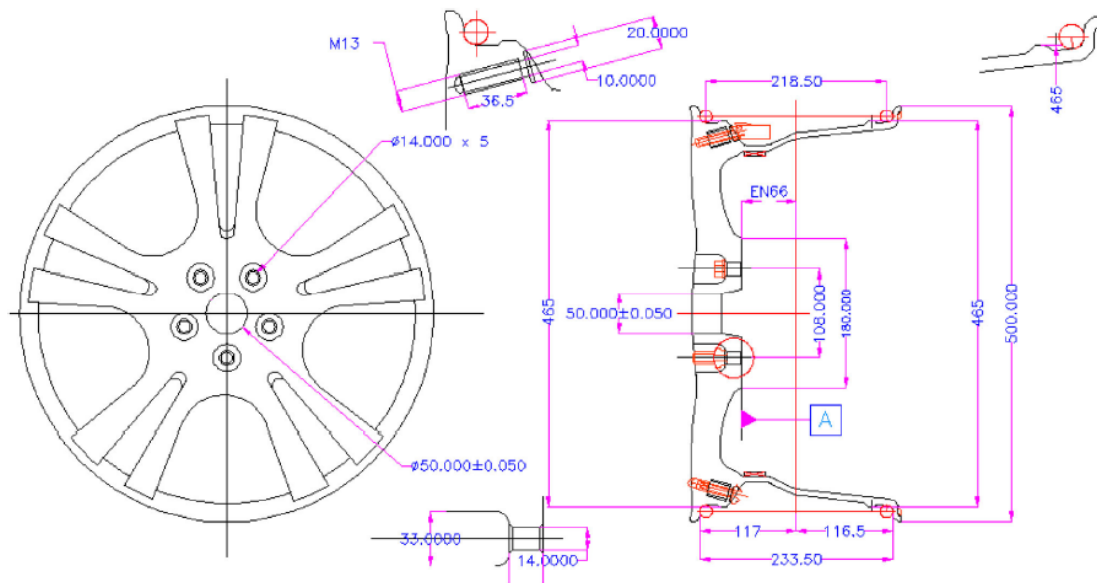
Alloy wheel machining drawing with center hole diameter of $\phi 50.000 (\pm 0.050)$ [24].
